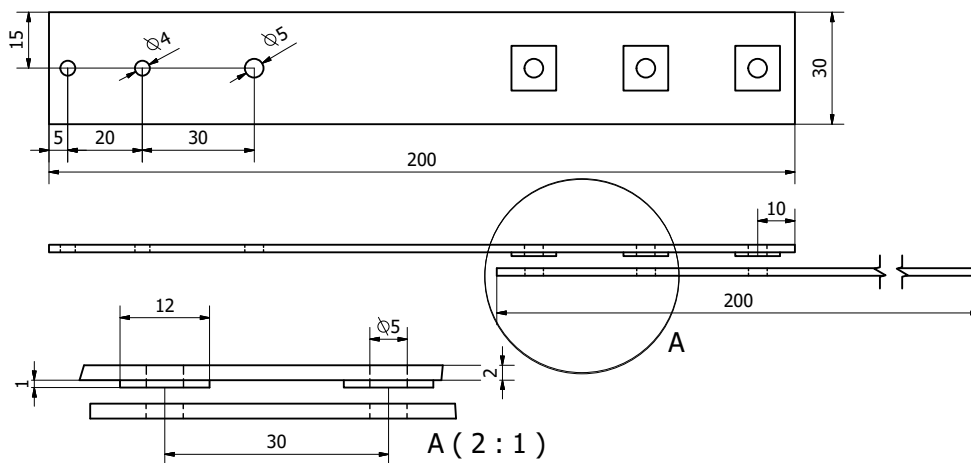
Mock-up ORION (dimensions in millimeters)
